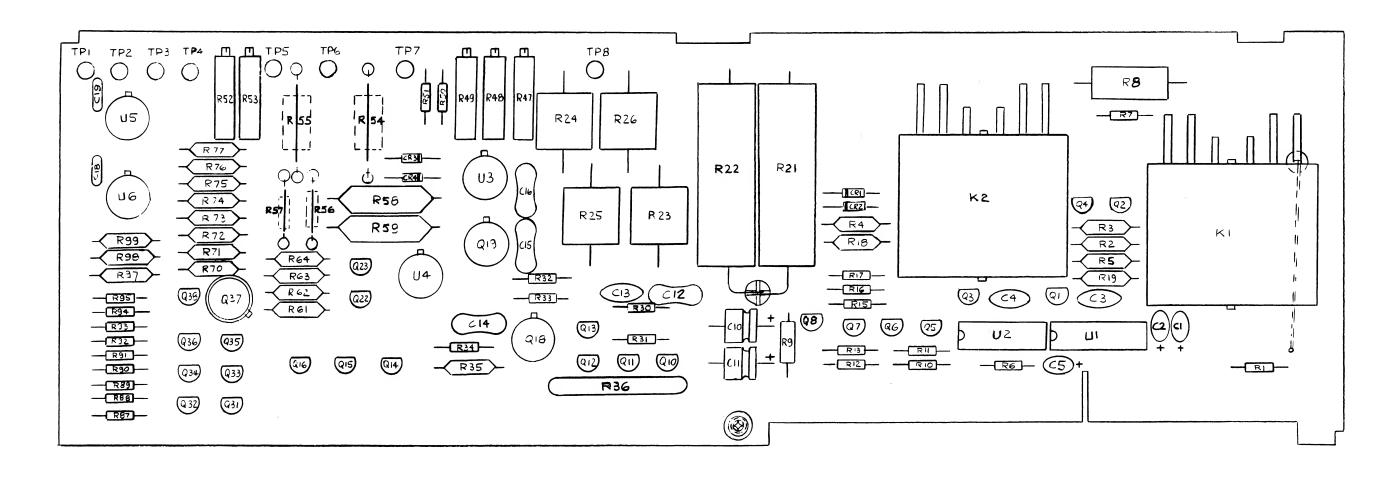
A7 Front Panel Display PCB Assembly (cont)
